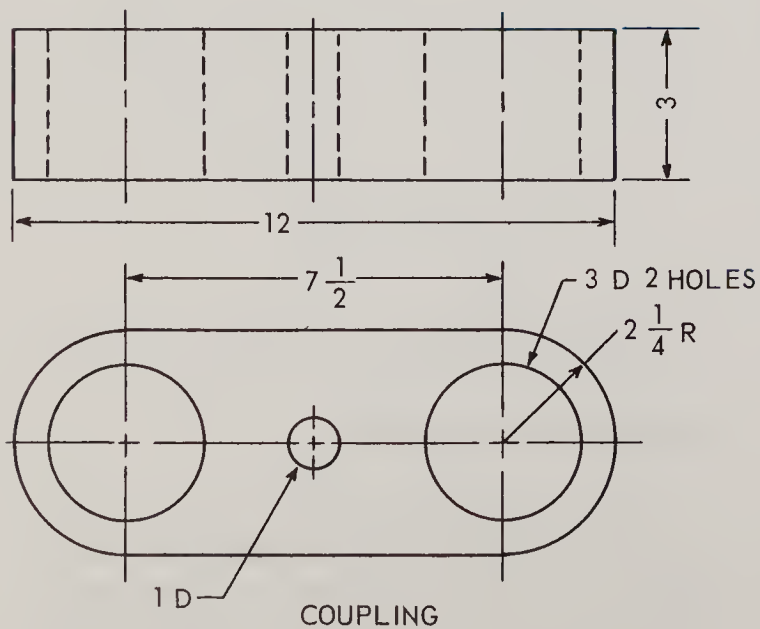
BPR-4. Make a cabinet oblique sketch of the Coupling. Dimension the sketch.
